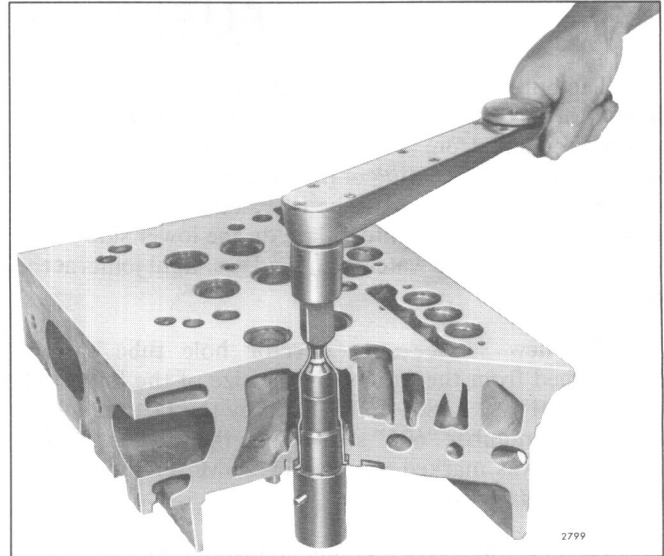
Upsetting Injector Tube with Tools J 5286-4C and J 5286-6
